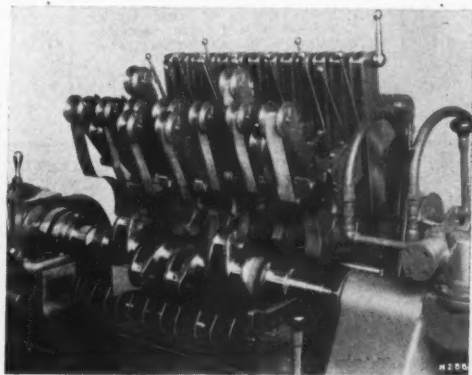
No. 30 Crank-O-Lap with crankshaft in position and machine arms raised.
